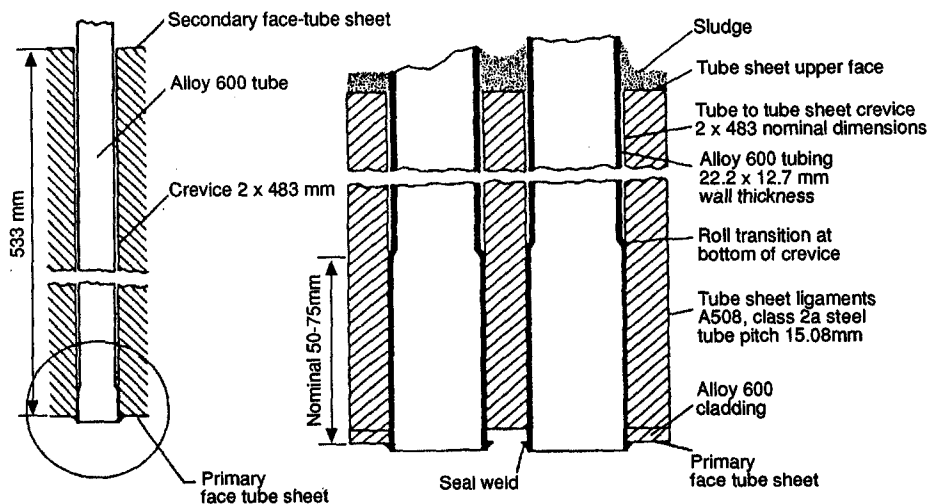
Typical steam generator tube-tubesheet annular crevice.
